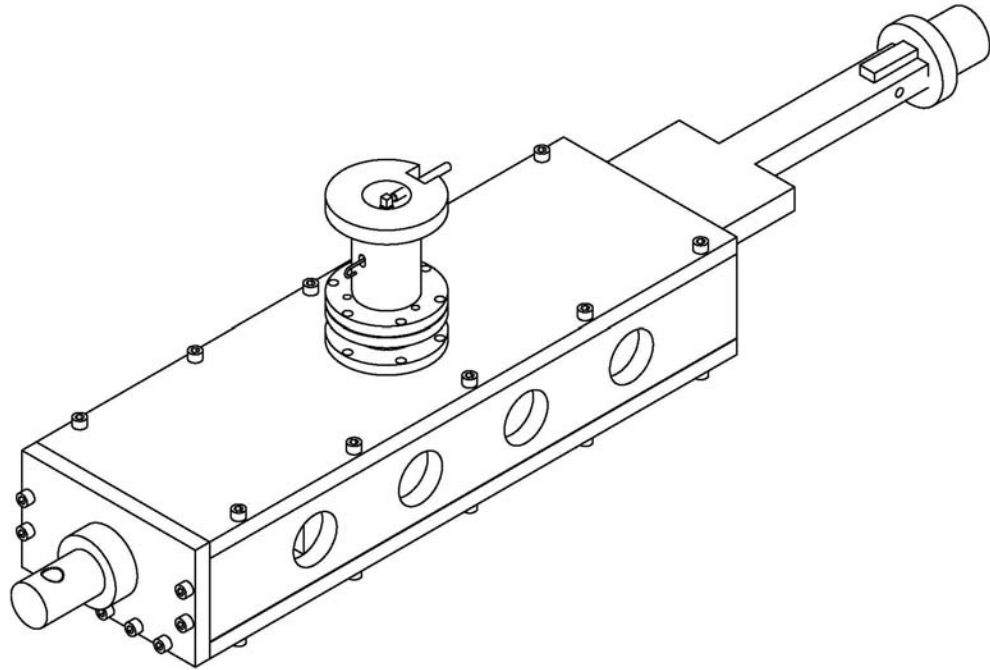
Exploded view of the Sliding Plate Rheometer.
